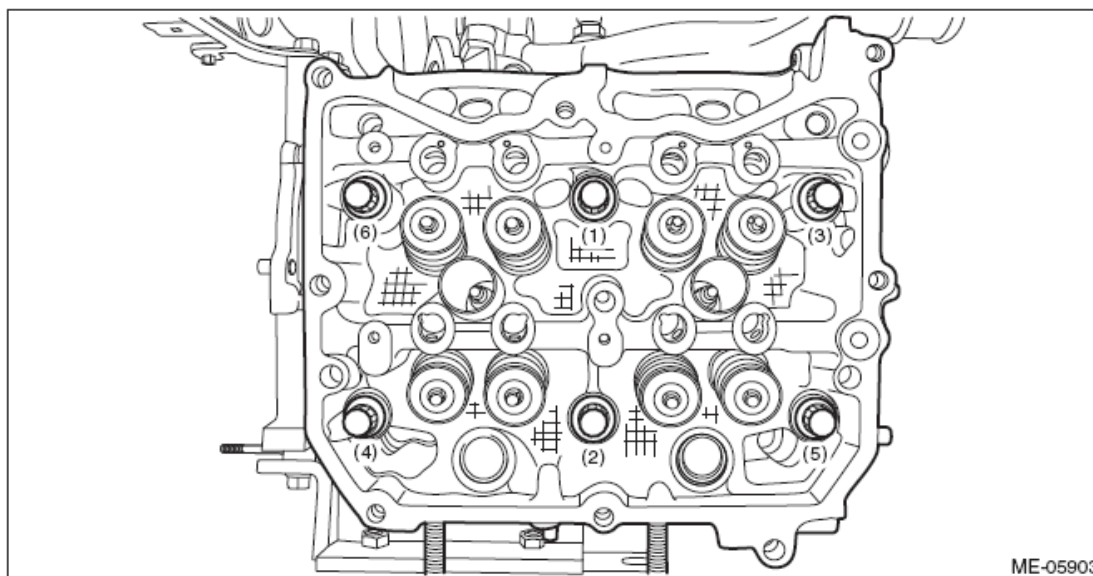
Identifying Cylinder Head Bolts Tightening Sequence
